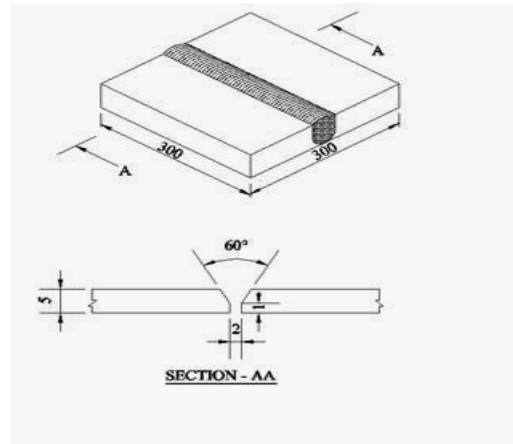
Schematic sketch of the weld joint (All dimensions are in 'mm')
